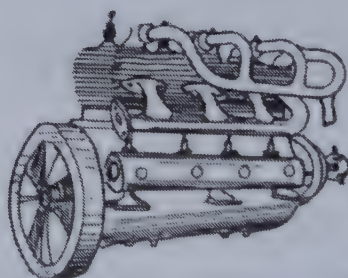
A Four Cylinder, Vertical, Air Cooled Gasoline Engine. Air cooled engine cylinders are usually small. The best method to increase power with air cooled engines is not by increasing the size of the cylinders but have a multiple of small cylinders. This is due to the heat. Larger cylinders are more difficult to cool.
